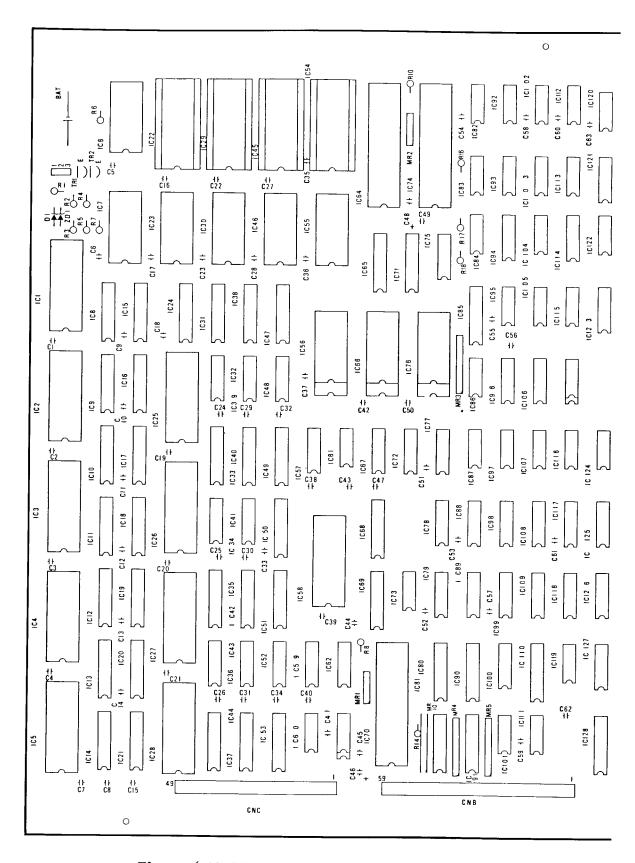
TX-1 Main PCB Assembly A042018-21 A
